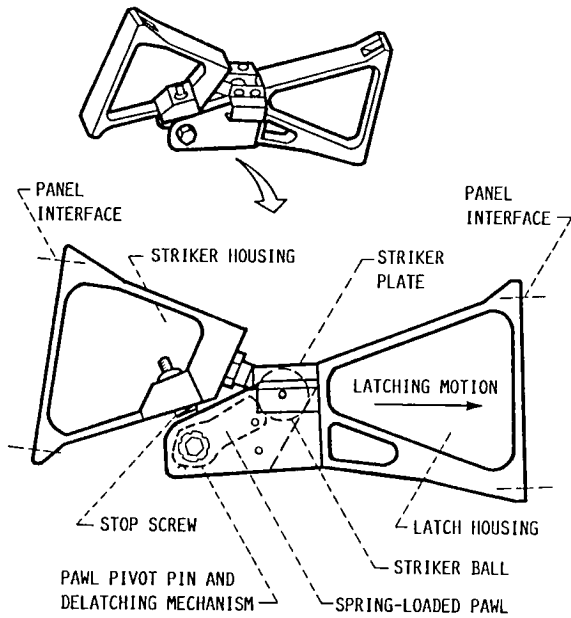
LATCH-STRIKER ASSEMBLY.
